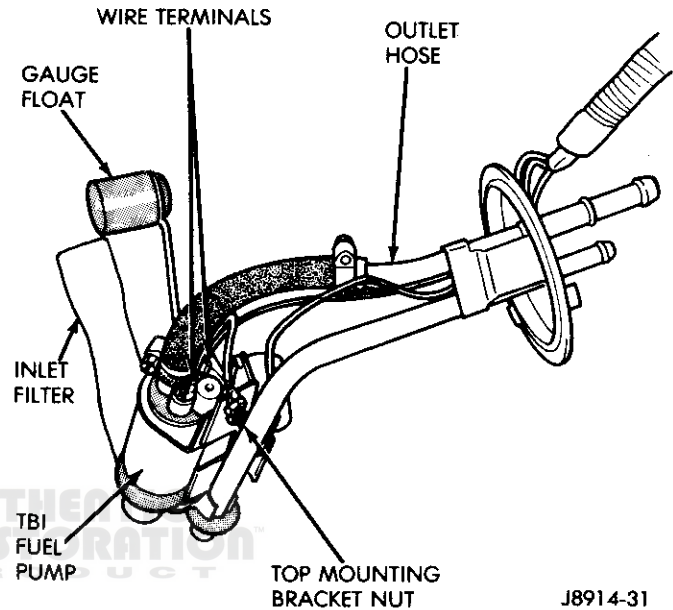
TBI Fuel Pump/Gauge Sender Unit Disassemble/Assemble
